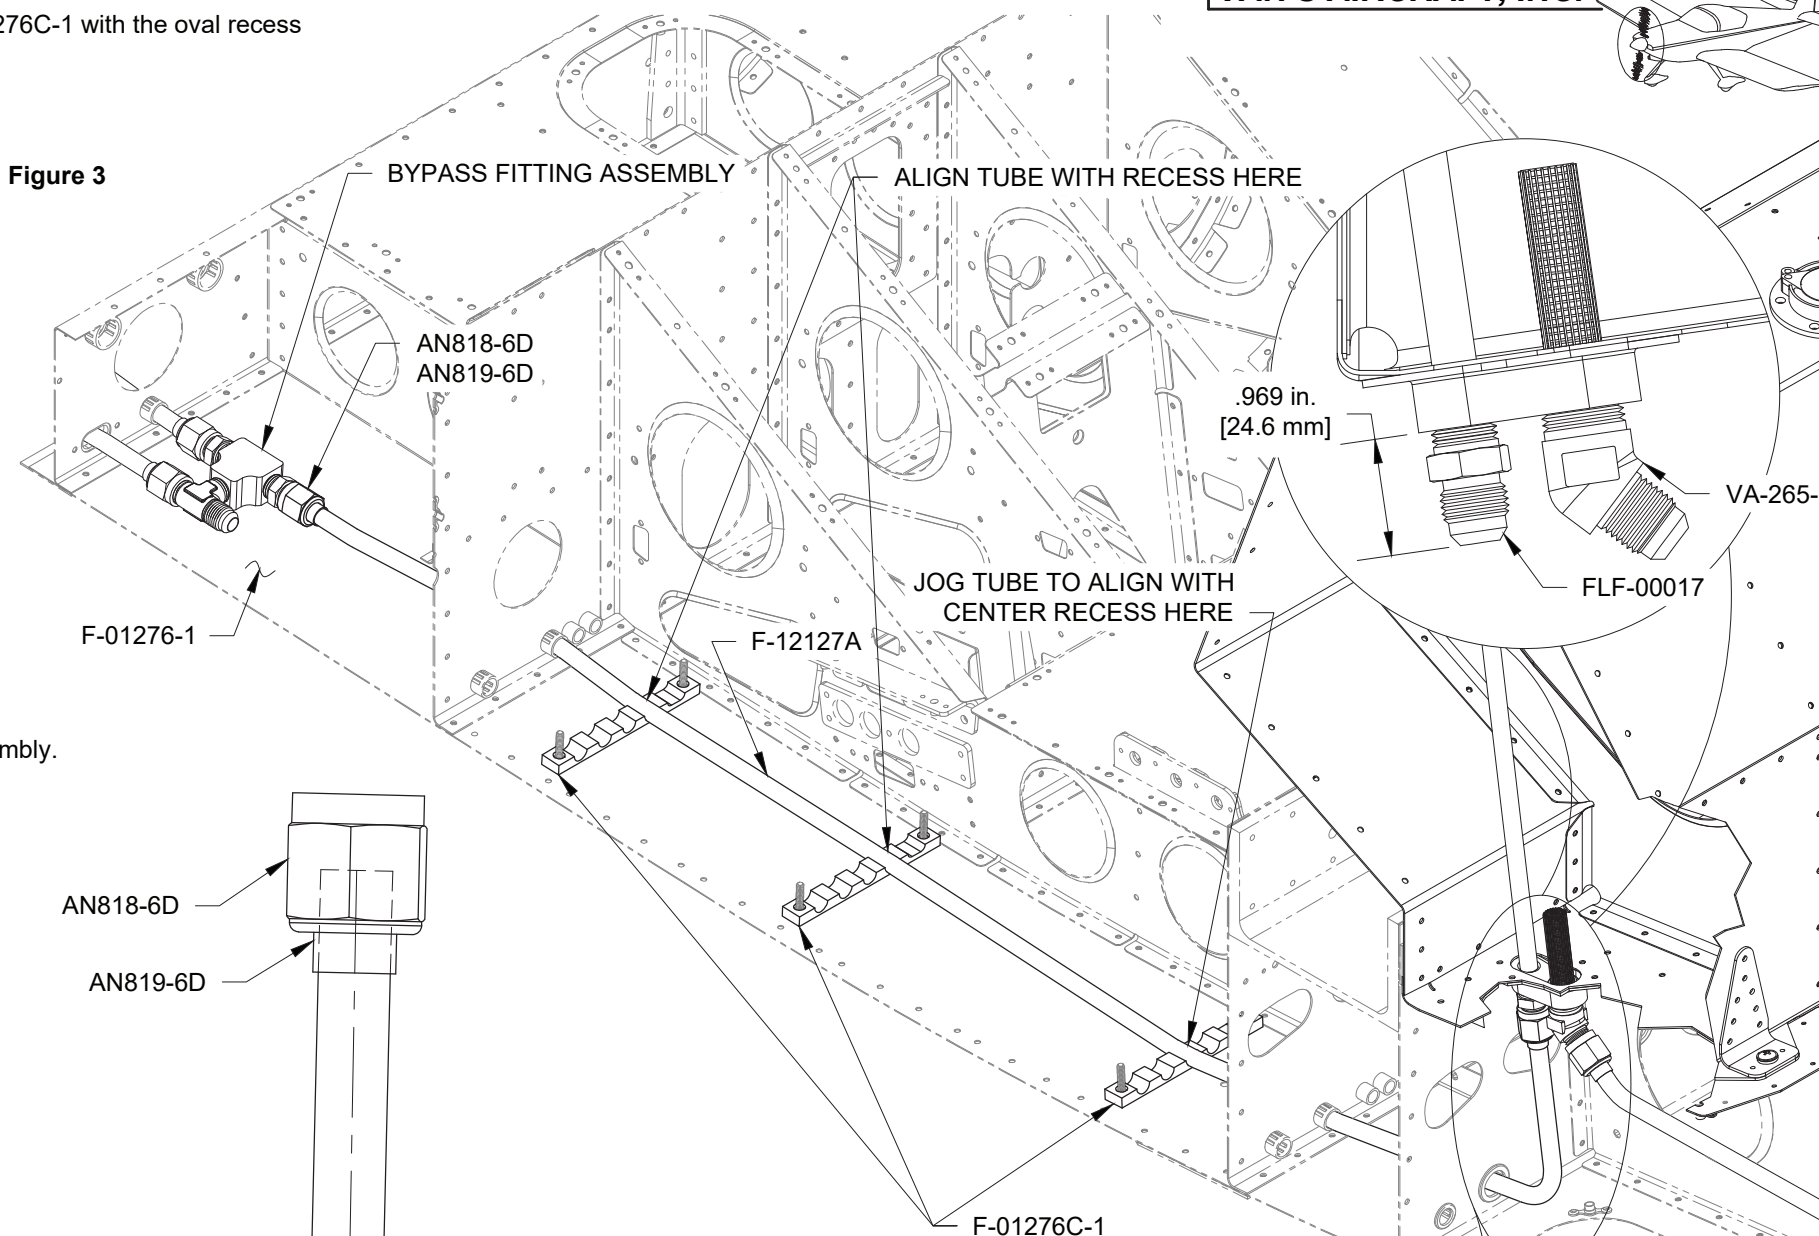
F-12127A BYPASS FITTING TO TANK FUEL LINE INSTALLATION
